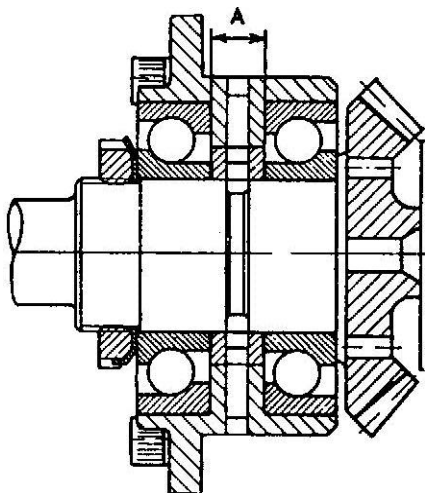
To determine spacer size in forward bearing box, measure shoulder of bearing box (A) and proceed as outlined in text.
